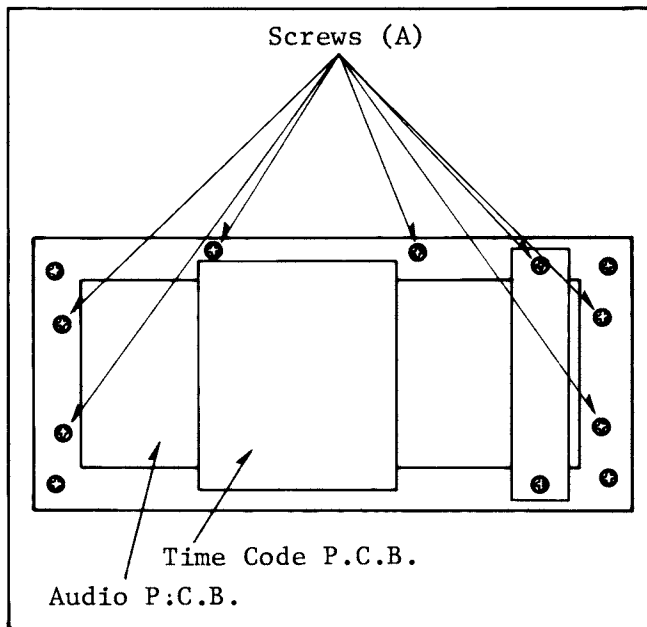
Removal of Audio P.C.B. (P-3)
